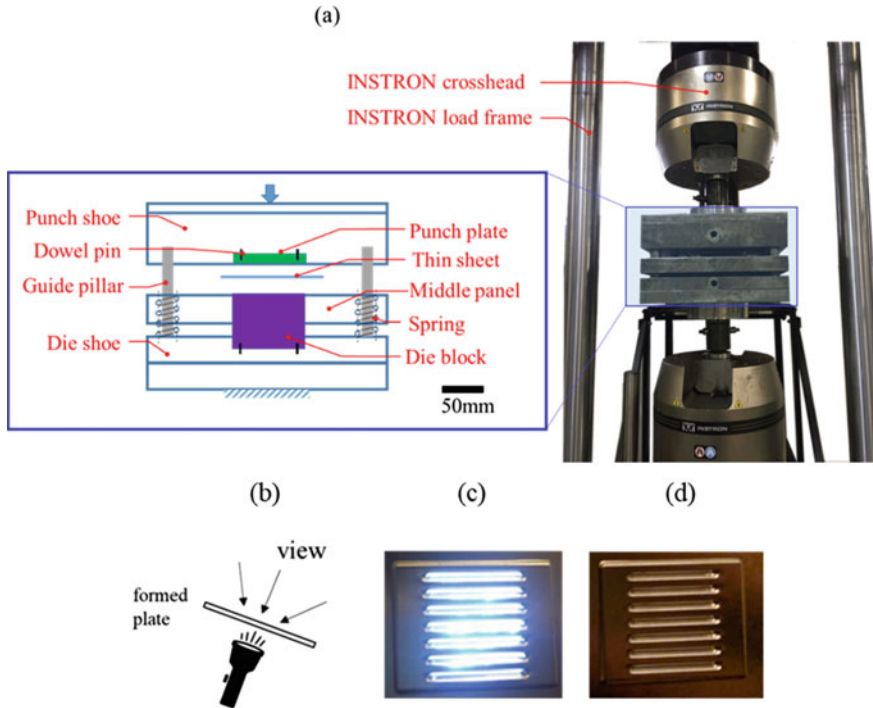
a Stamping tool schematics and the test setup. b White light method used to identify cracks and pin holes. Examples of channel patterns formed: c failed and d successful
